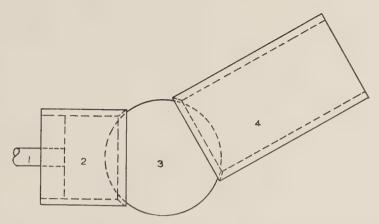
Equipment For Sphere Cutting. 1, spindle; 2, pipe attached to spindle; 3, sphere; 4, pipe held by hand.
